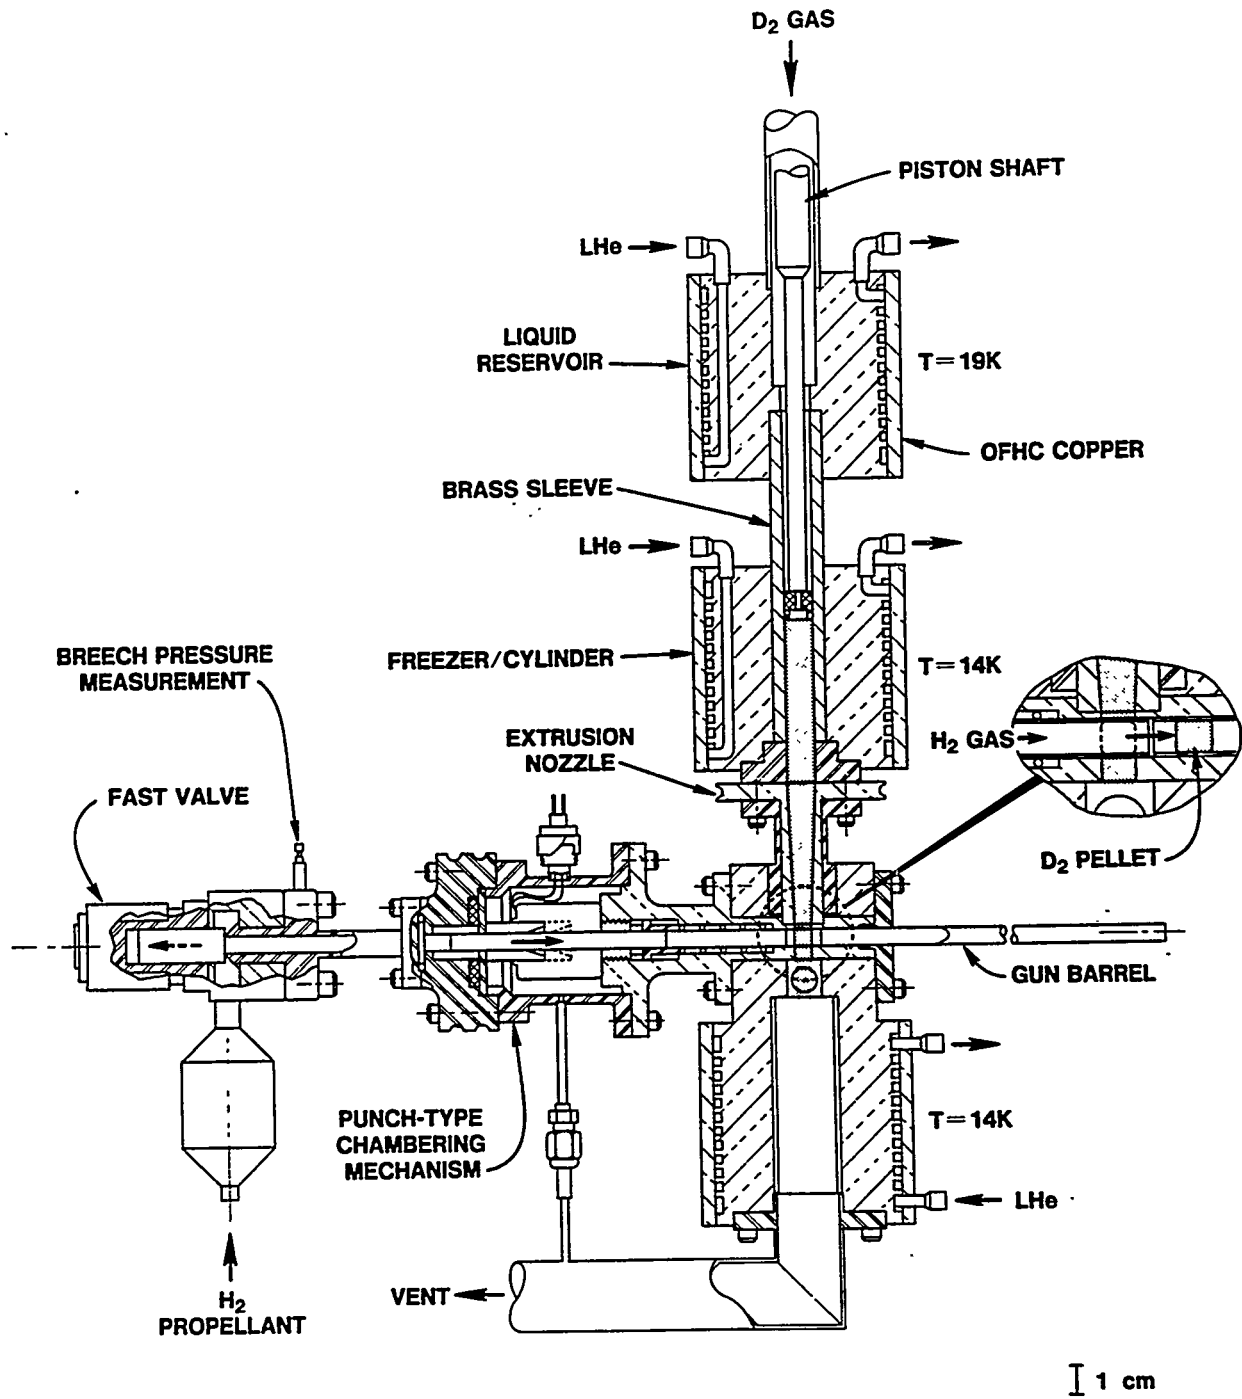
Schematic of cryogenic extruder and gun assembly for repeating pneumatic injector
